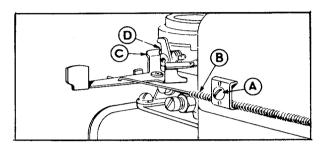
THROTTLE CONTROL ADJUSTMENT
